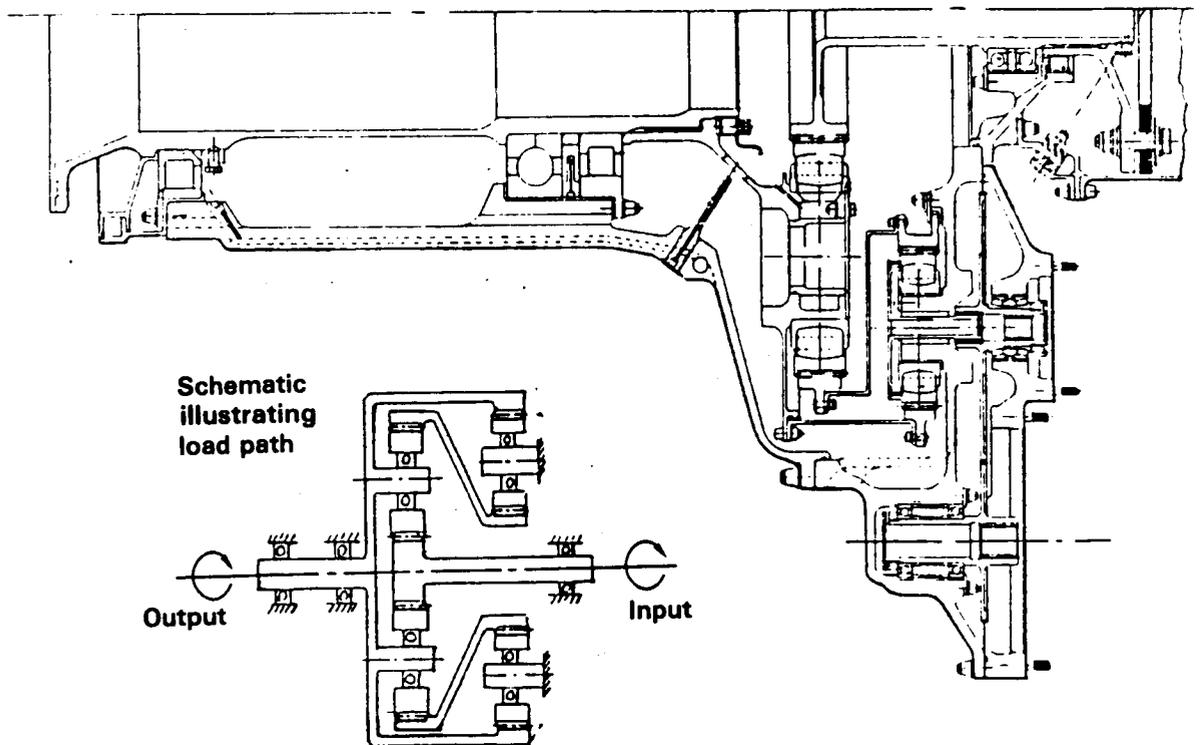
Split Path In-Line Reduction Gear - This system features minimum diameter and weight. (J27638-906)
